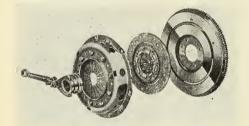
The clutch is used when starting a car, when stopping, and when shifting gears. (Courtesy Chevrolet Motors Sales Corp.)
